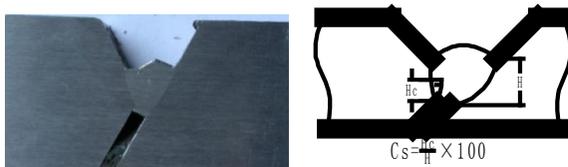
Cross-section of oblique Y-groove welded seam.
